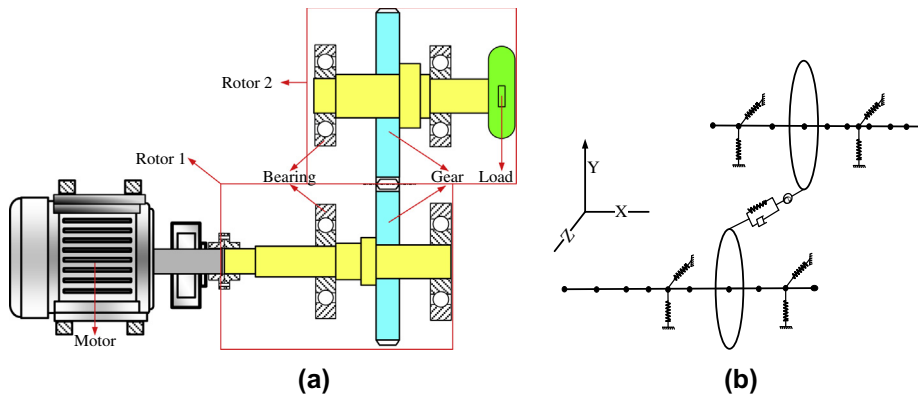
(a) Typical gear-rotor system configuration and (b) schematic of setup for the dynamic finite element modeling of gear-rotor system.
